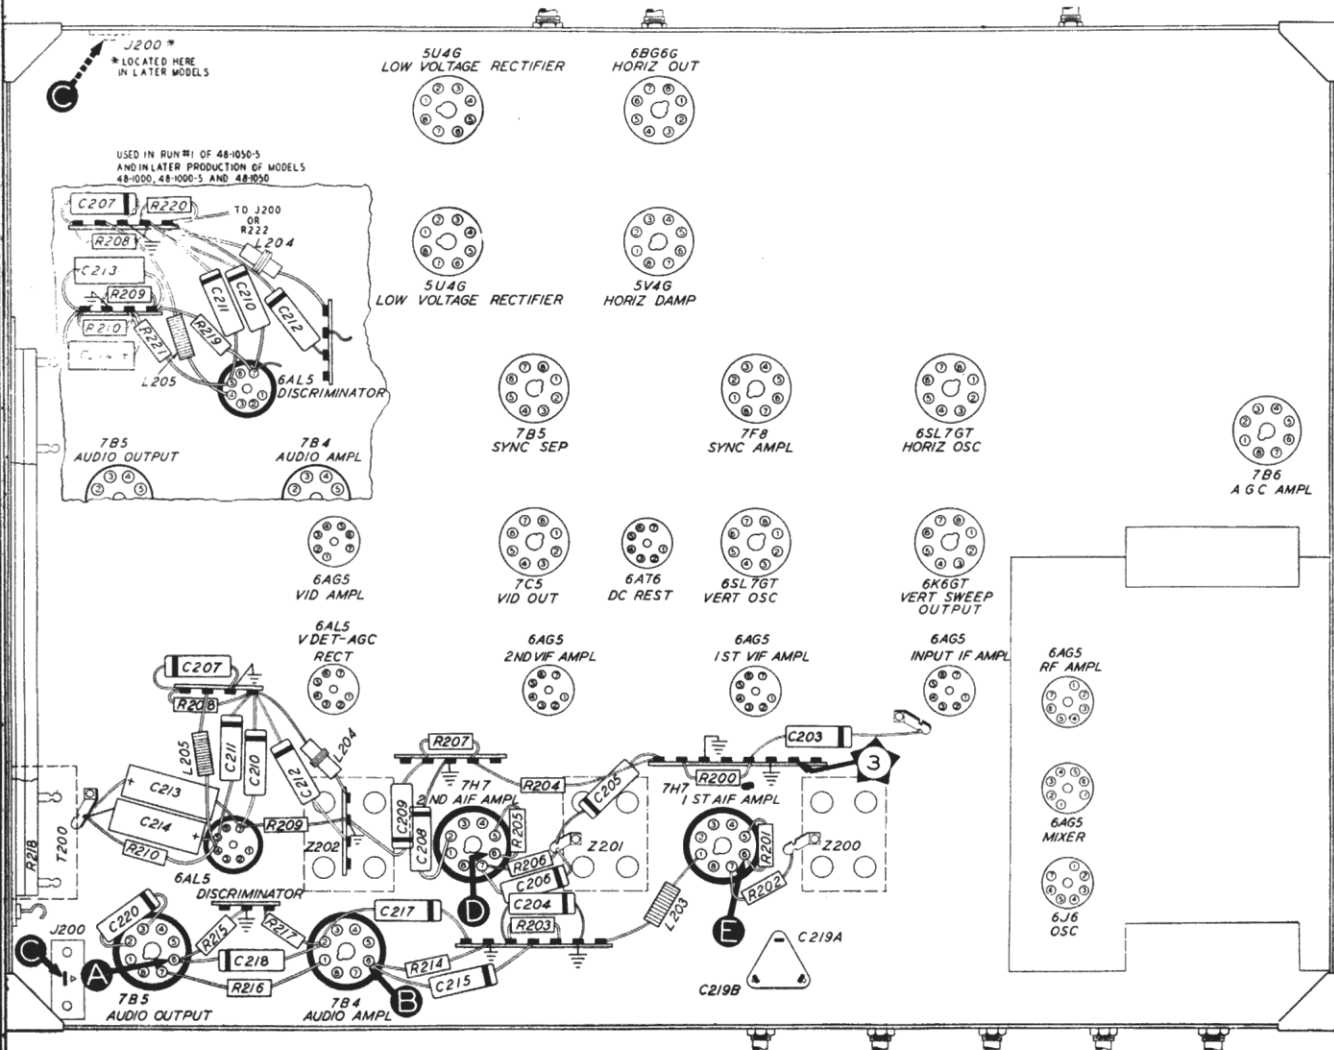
BOTTOM VIEW, SHOWING SECTION 2 TEST POINTS
